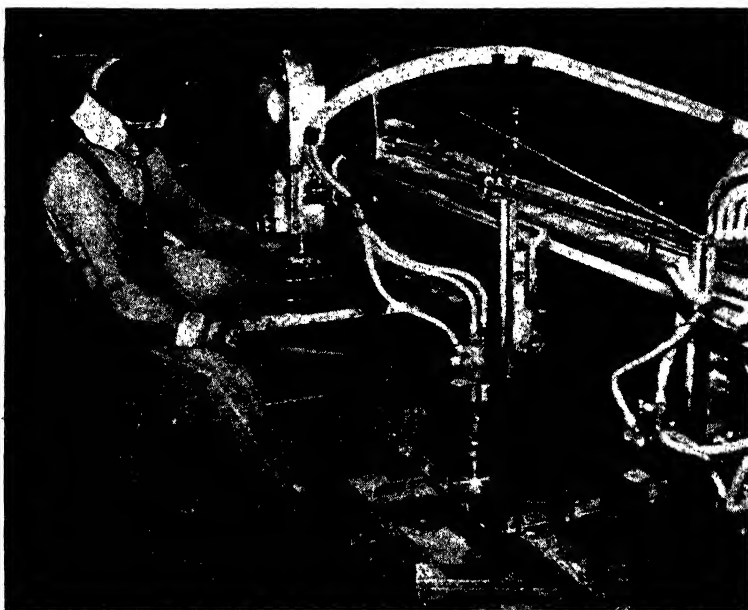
Stack cutting irregularly shaped parts from thin plates. (*Courtesy of R. G. LeTourneau, Inc.*)
